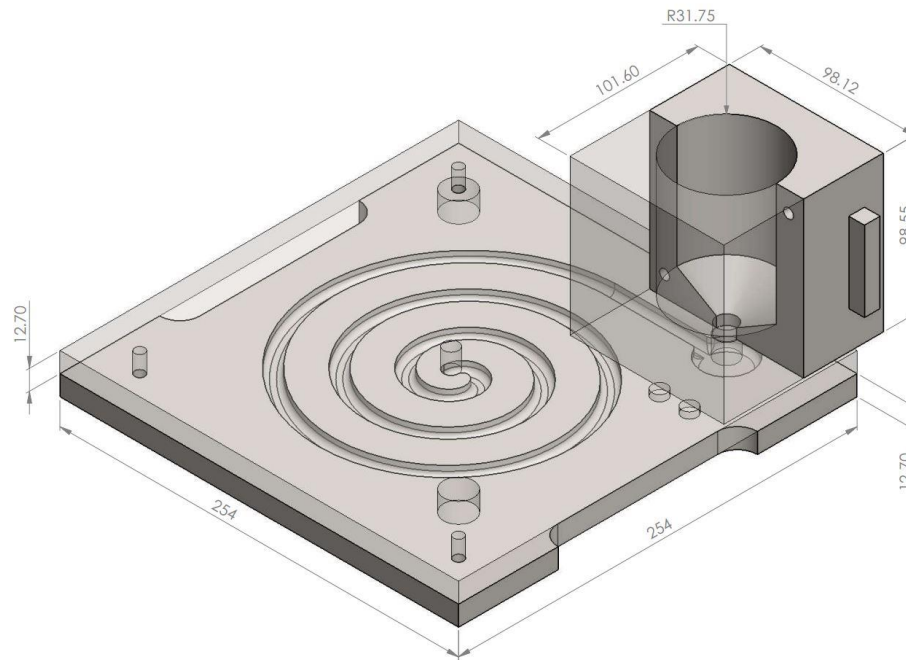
Fluidity mold CAD model (dimensions in mm)
